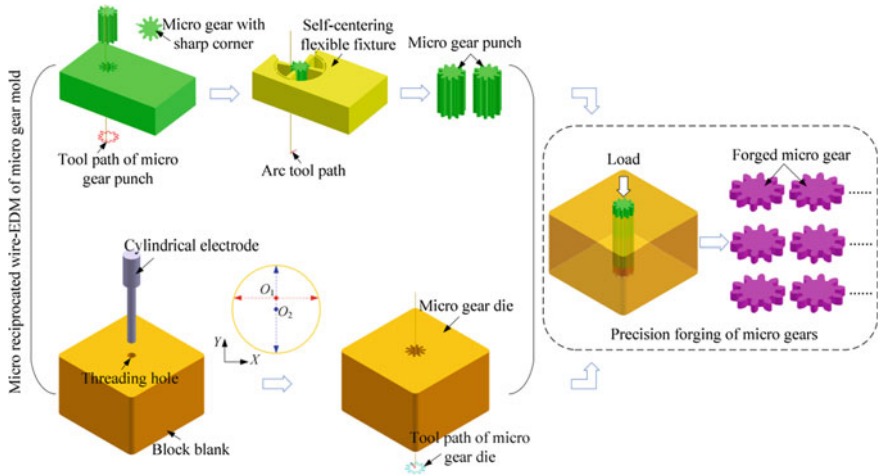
Machining process of micro-gears combining micro-reciprocated wire EDM and precision forging [7]
